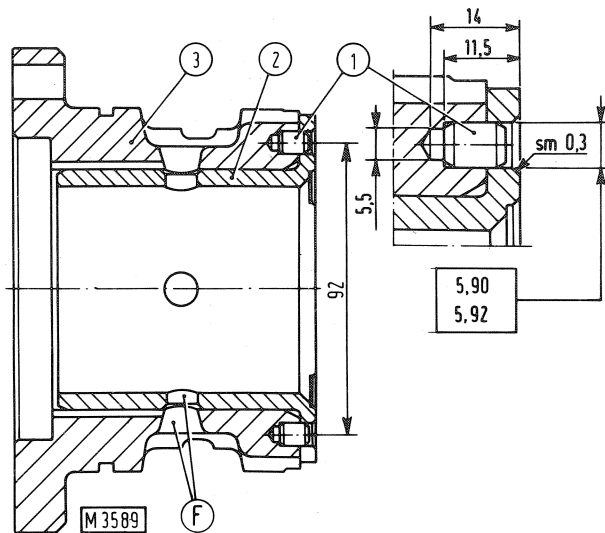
Sizes of dowel pin holes in track roller and idler wheel bushing carriers.
